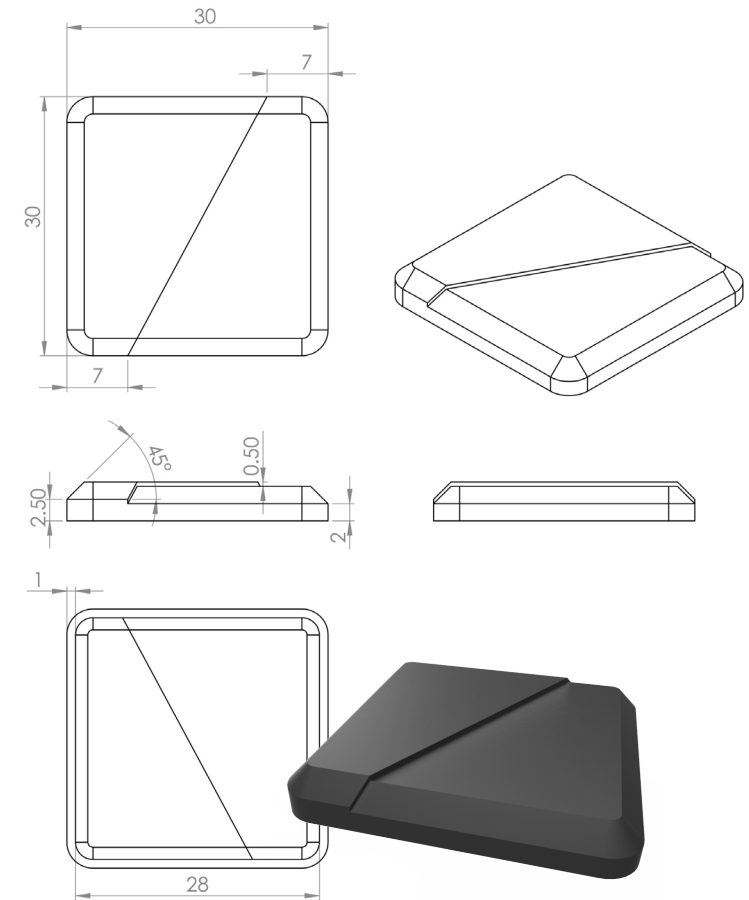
Image showing the engineering drawing of the top piece. All measurements are in mm
